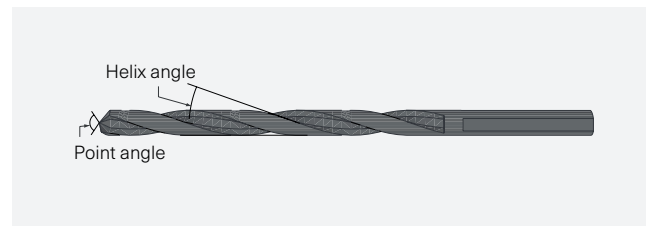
Drills for Marpet-a FS and Marpet-g FS sheets
